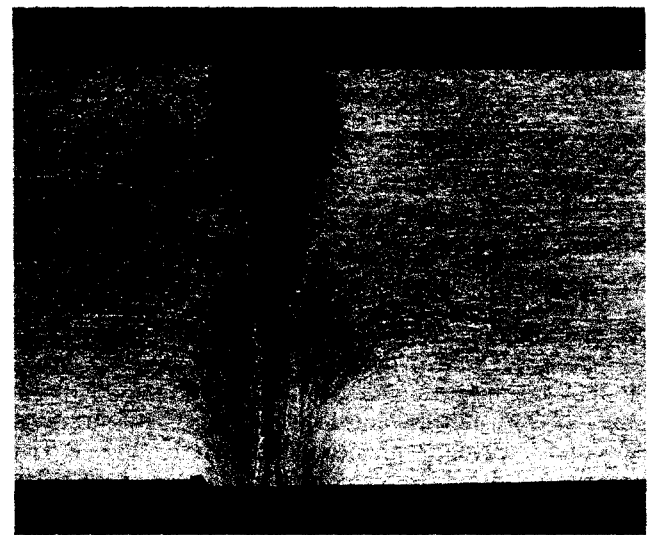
Transverse Flow Lines in a Cold Welded Butt Joint
